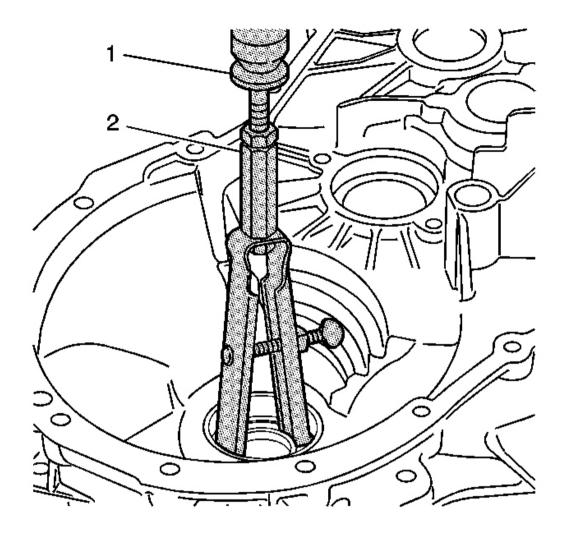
Differential Bearing Outer Race, J 44380 & J 23907 Courtesy of GENERAL MOTORS CORP.
